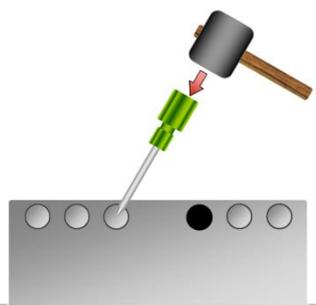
Punching out the removable pieces of the punch-through holes of the metal case.
